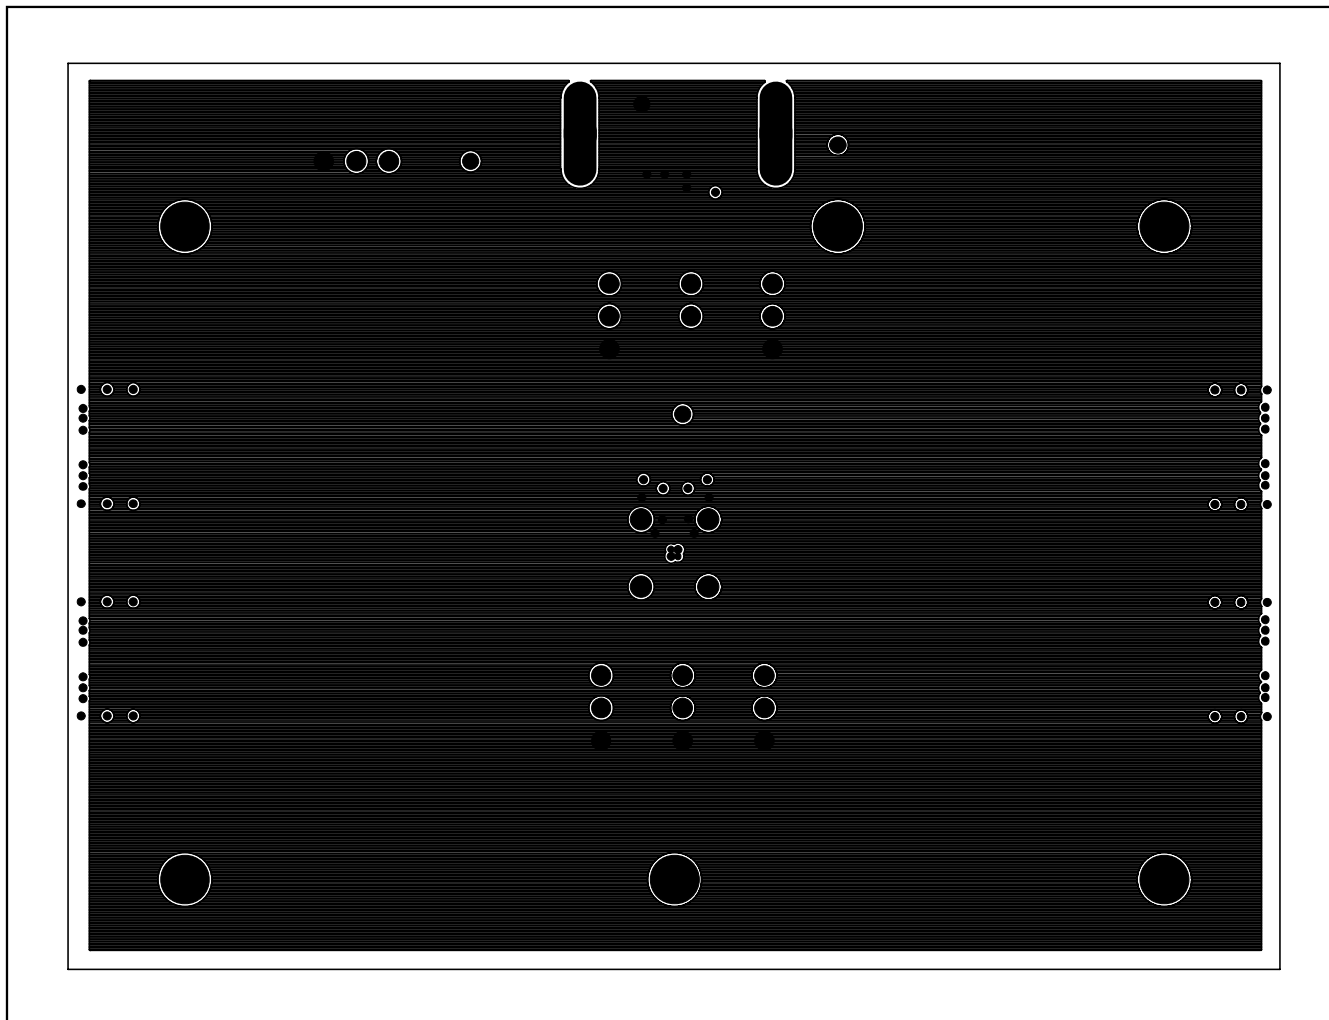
MAX3984 EV Kit PCB Layout—Power Plane, Layer 3
